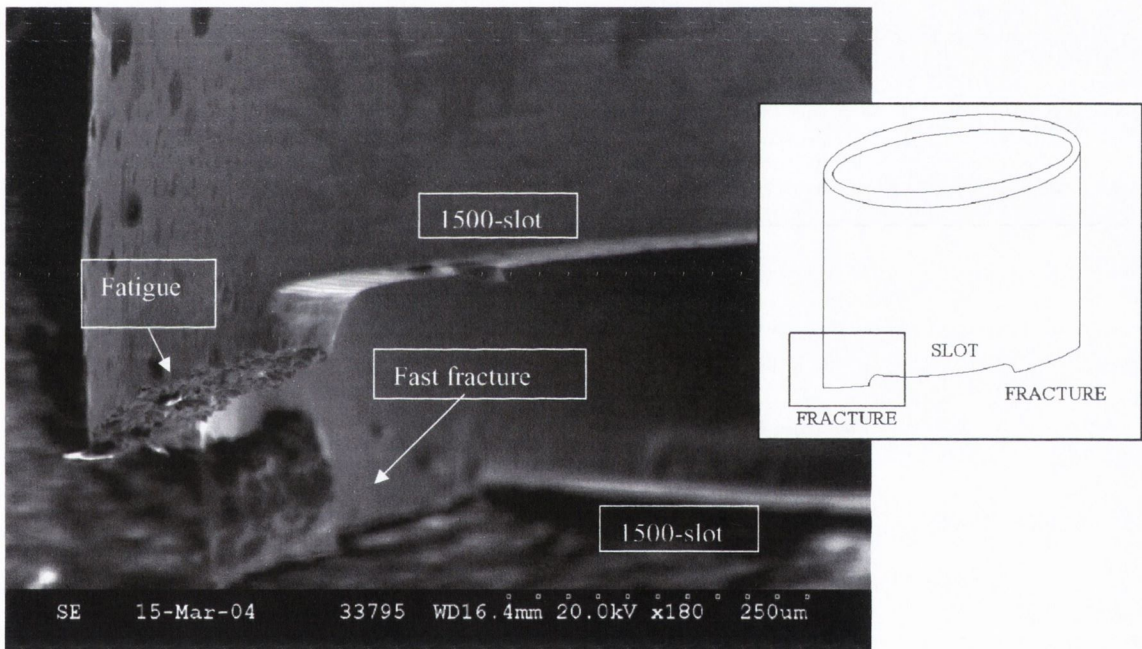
Flat fracture surface of a 1500-slotted tubing piece
